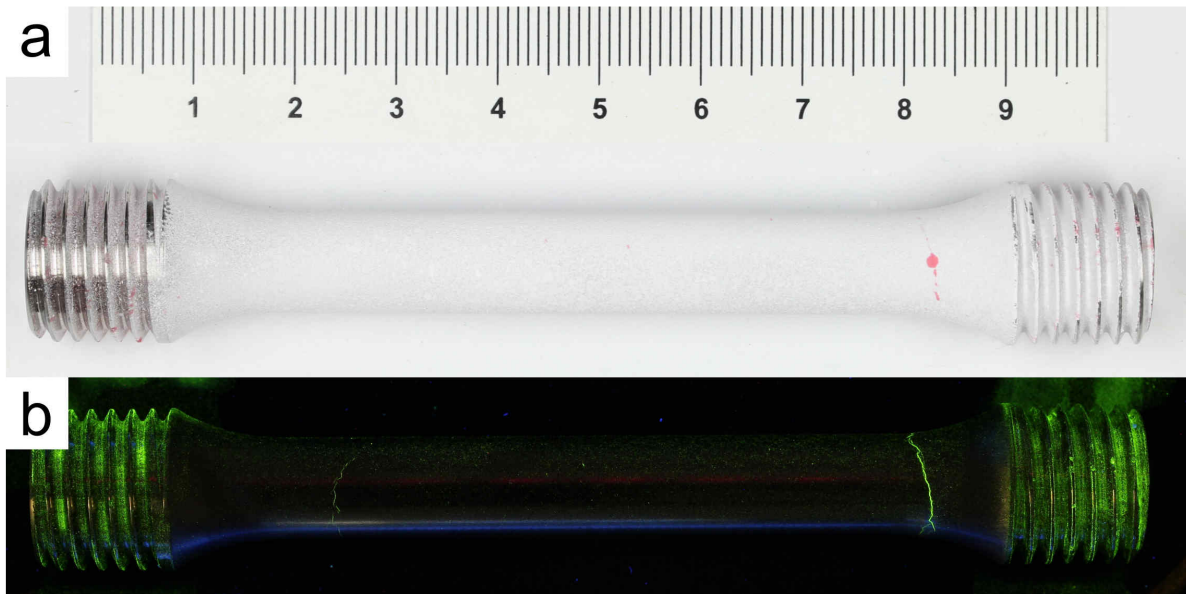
Dye penetrant inspection (a) and magnetic particle inspection (b) of a reference sample with surface cracks. Adapted from [143].
